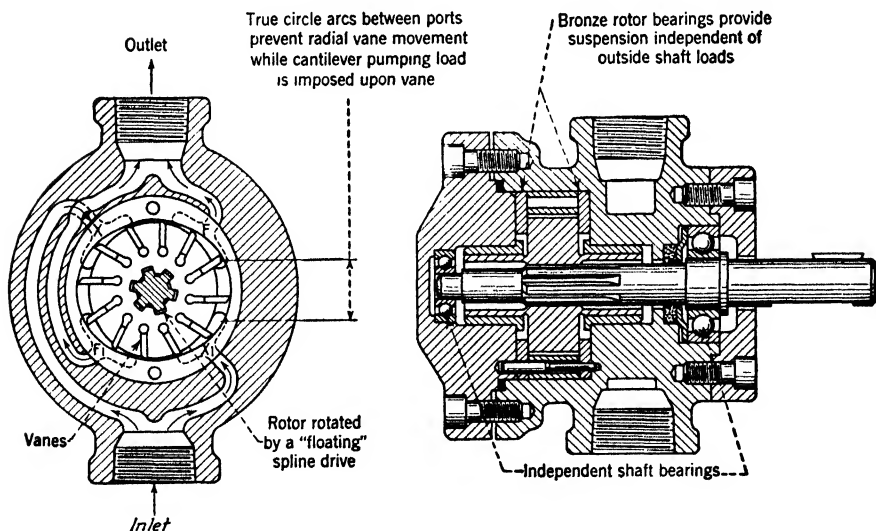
Hydraulically balanced vane pump. (Courtesy of Vickers Incorporated.)
